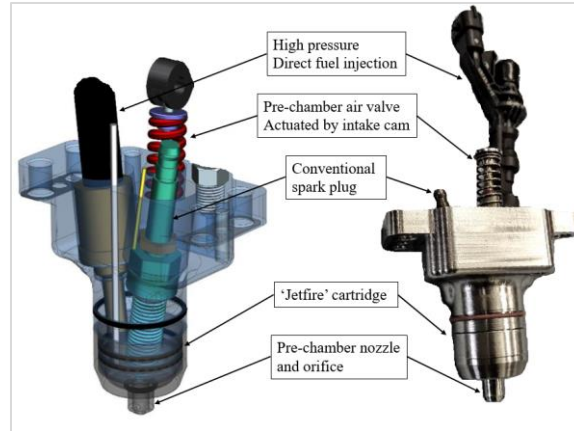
Pre-chamber Jetfire cartridge package CAD design and actual picture
